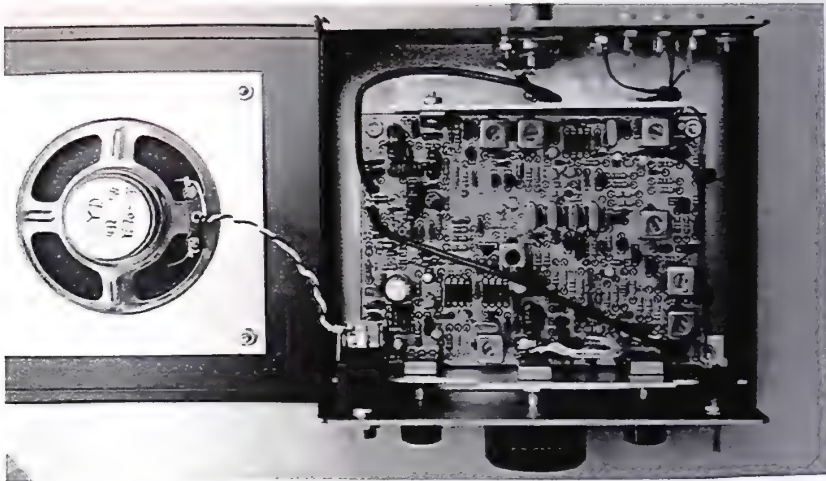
Inside view of the Ten-Tec 1330 after assembly. All components are mounted on a single pc board with front and rear subchassis.
